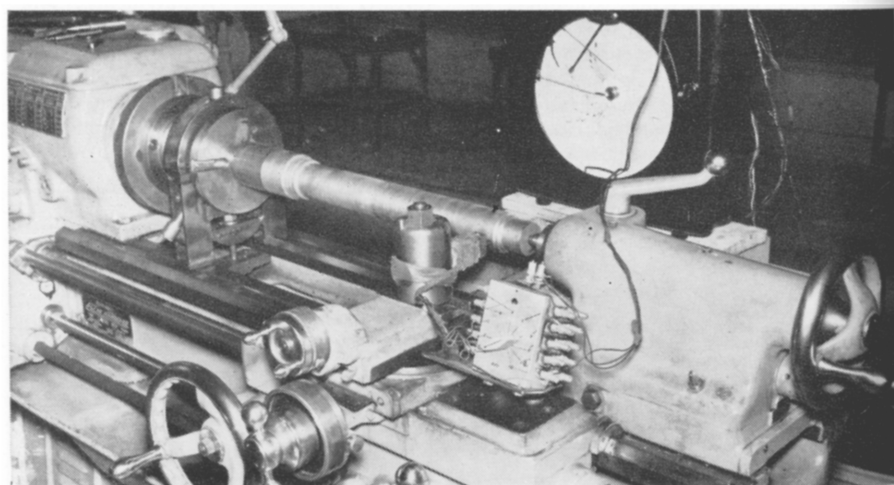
The instrument for measuring tool force includes a torsional dynamometer secured to the lathe face plate, a tool holder which serves as a tool-post dynamometer and a recording device which can be connected to any of the strain gages by the selector switch shown in the foreground.
